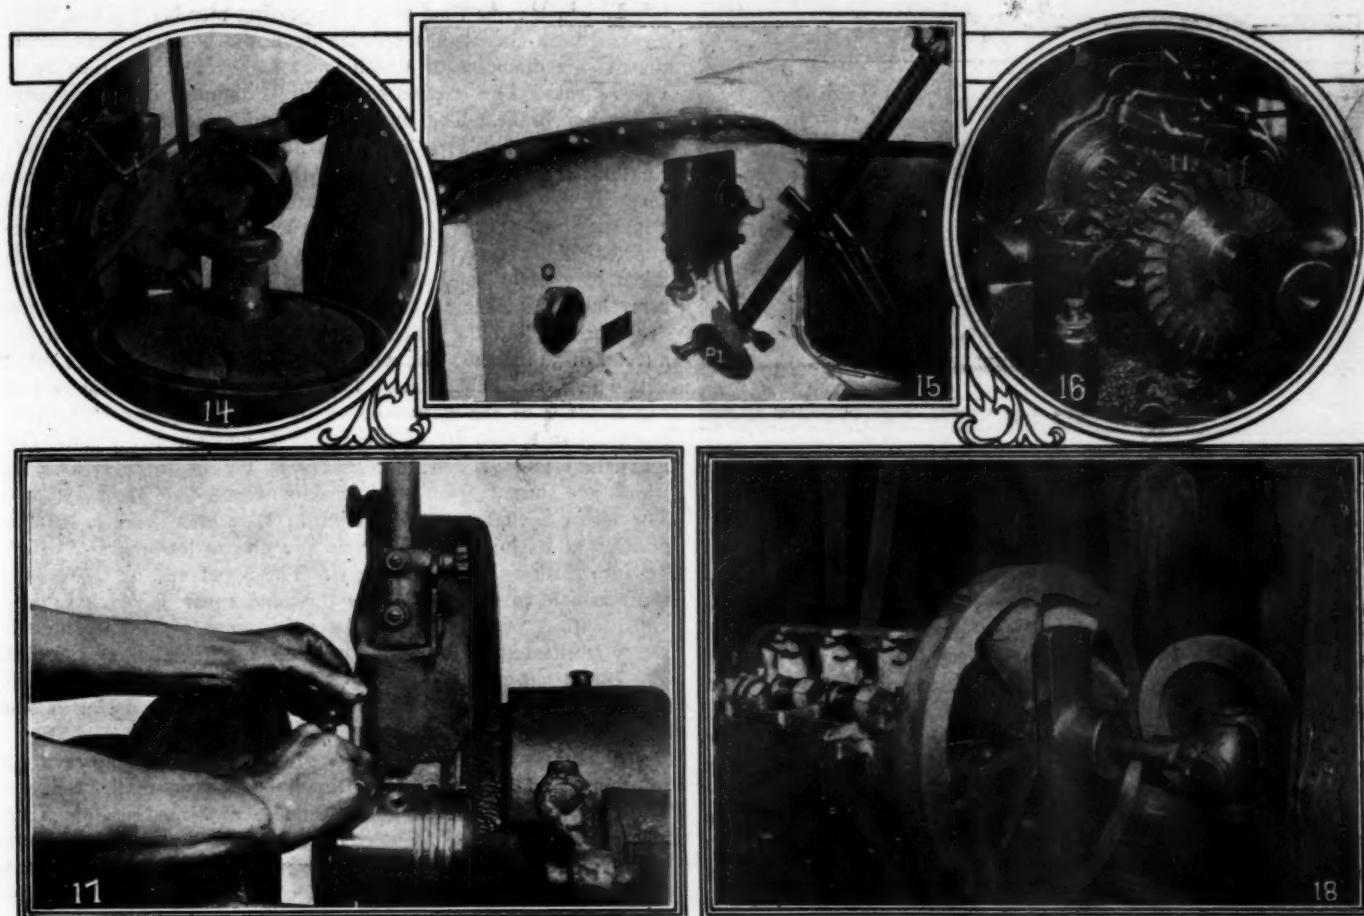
Showing the method employed in Maxwell plant of cutting timing gears
